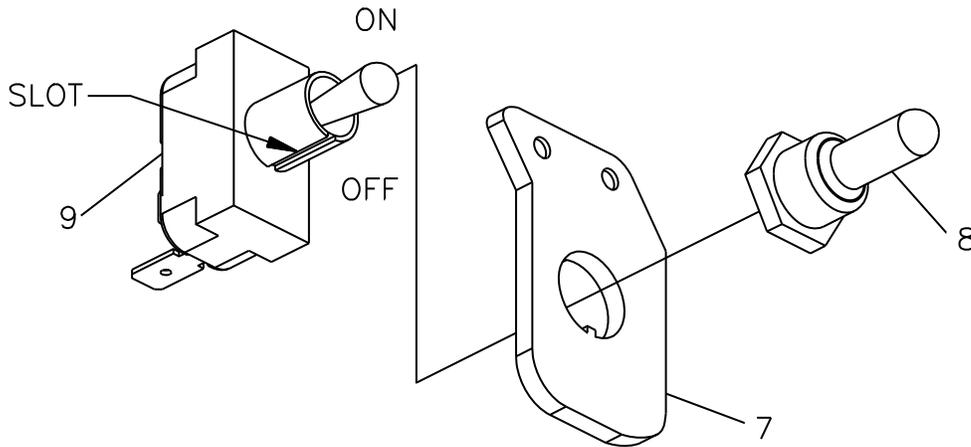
Assembly and Mounting Orientation of Toggle Switch
